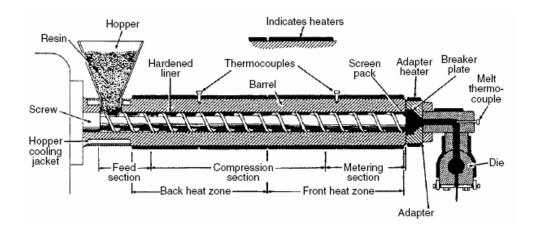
Schematic Representation of Single-screw extruder [26]
